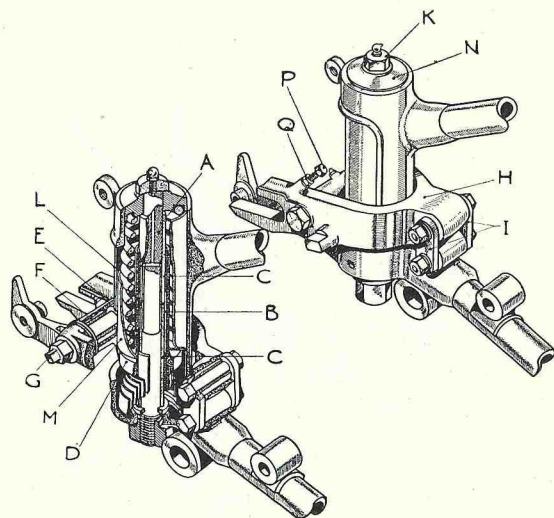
SECTION OF PLUNGER TYPE FRAME ATTACHMENT.
